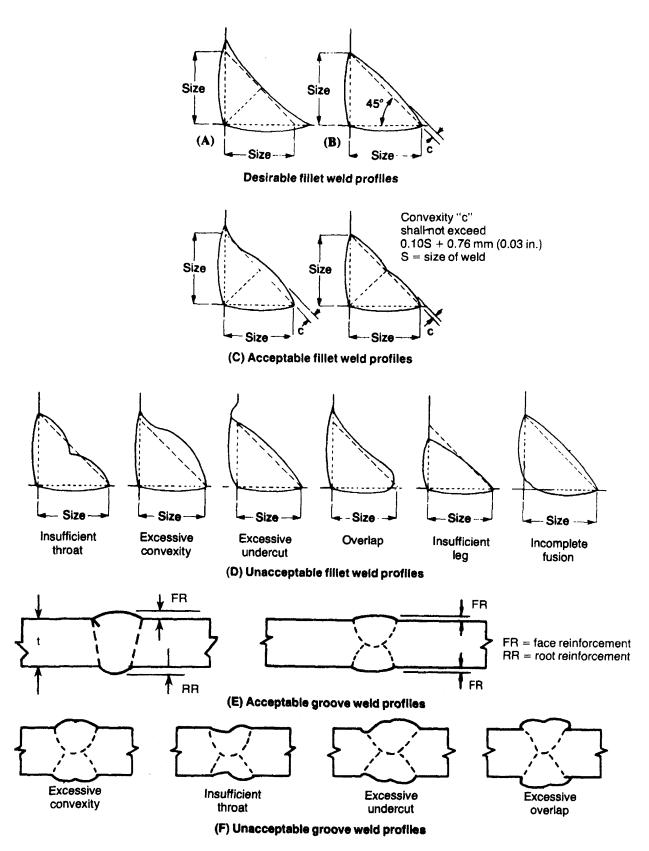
Acceptable and unacceptable weld profiles
